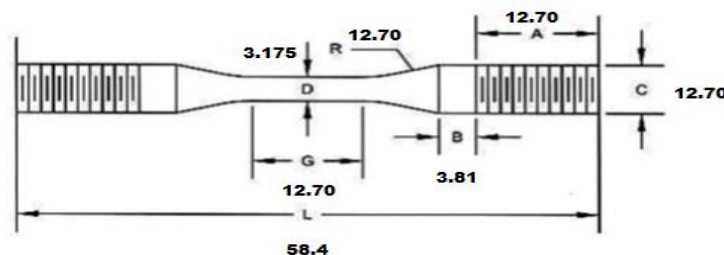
Schematic of the cylindrical test specimen used for mechanical testing.
